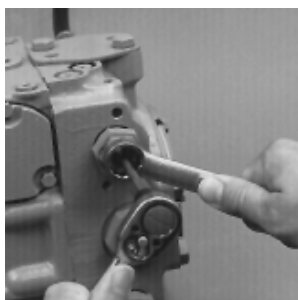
Loosen Pressure Adjusting Screw Locknut (Typical for 130 through 250 "Range 2")
